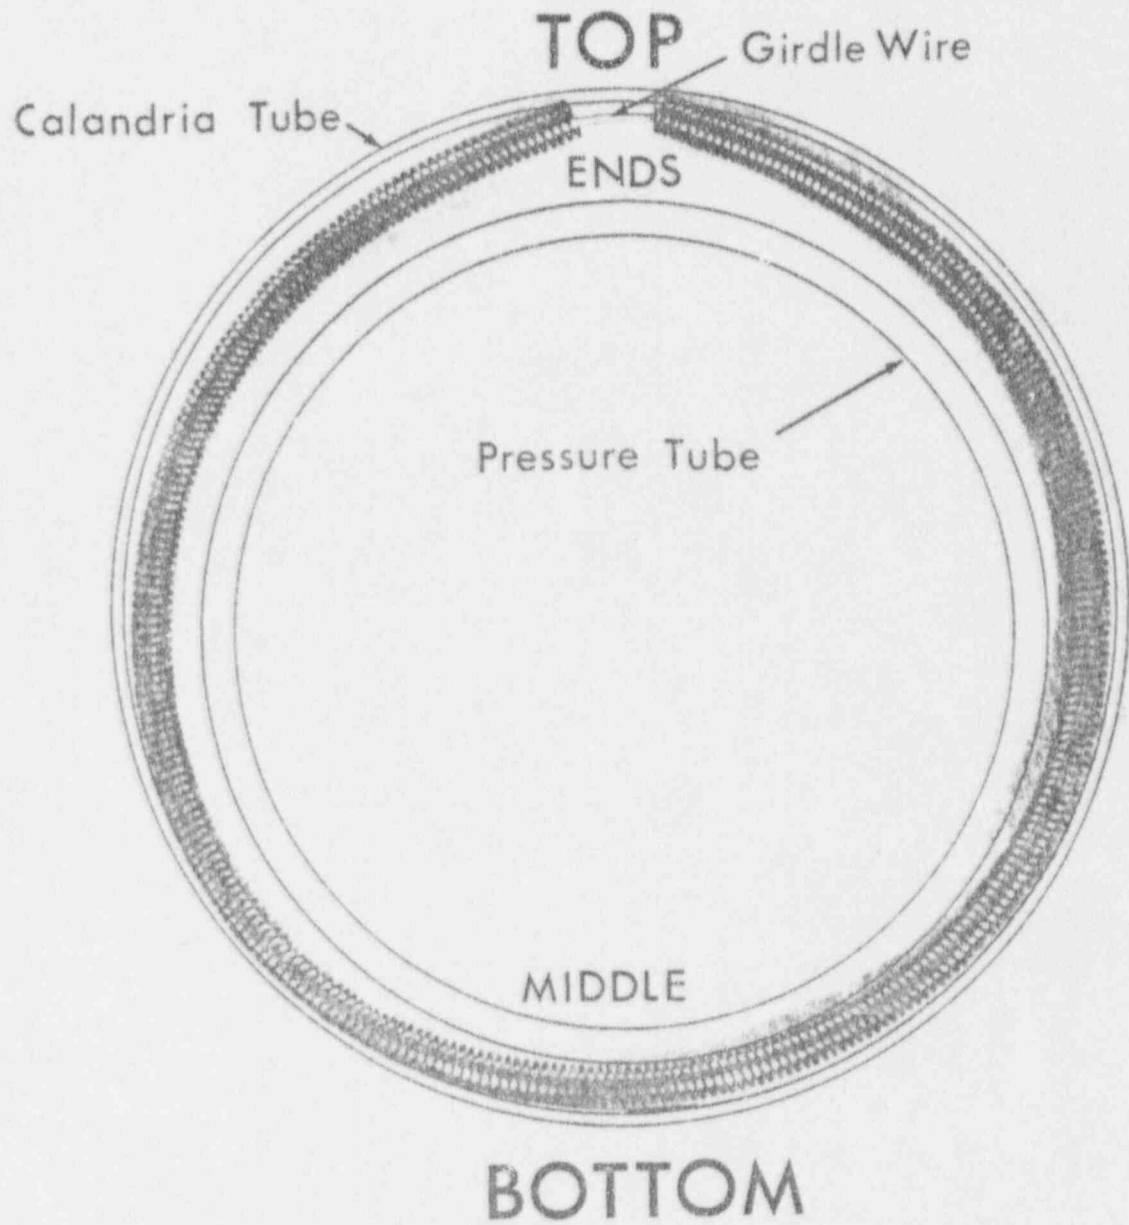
Cross-section of a Pickering Fuel Channel showing the fit of the garter spring between the pressure tube and the calandria tube.
